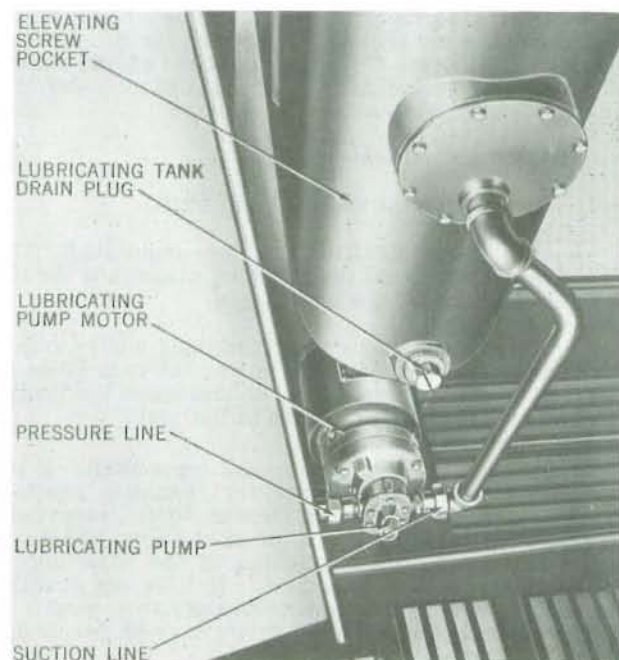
Elevating Screw Lubrication Pump and Cover
